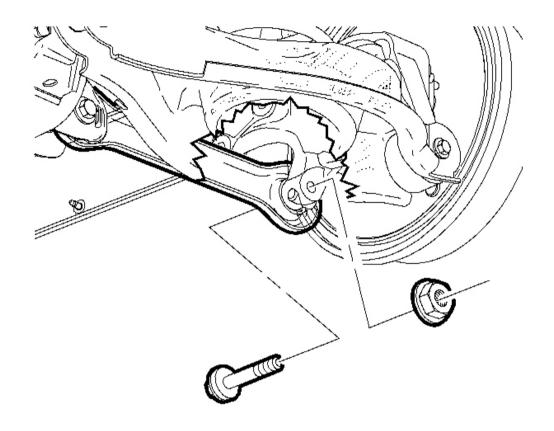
Toe Link, Knuckle Bolt & Nut Courtesy of GENERAL MOTORS CORP.
